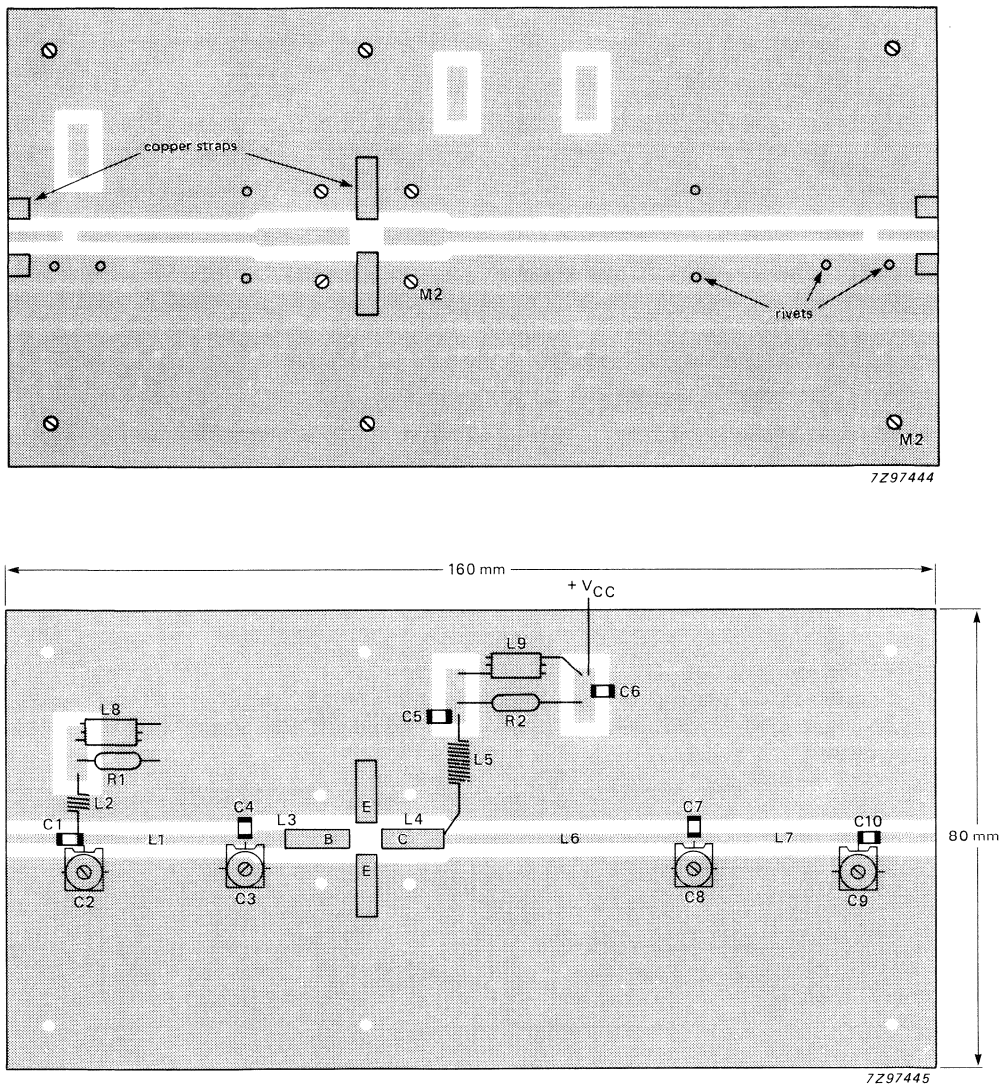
Printed-circuit board and component lay-out for 900 MHz class-B test circuit.
